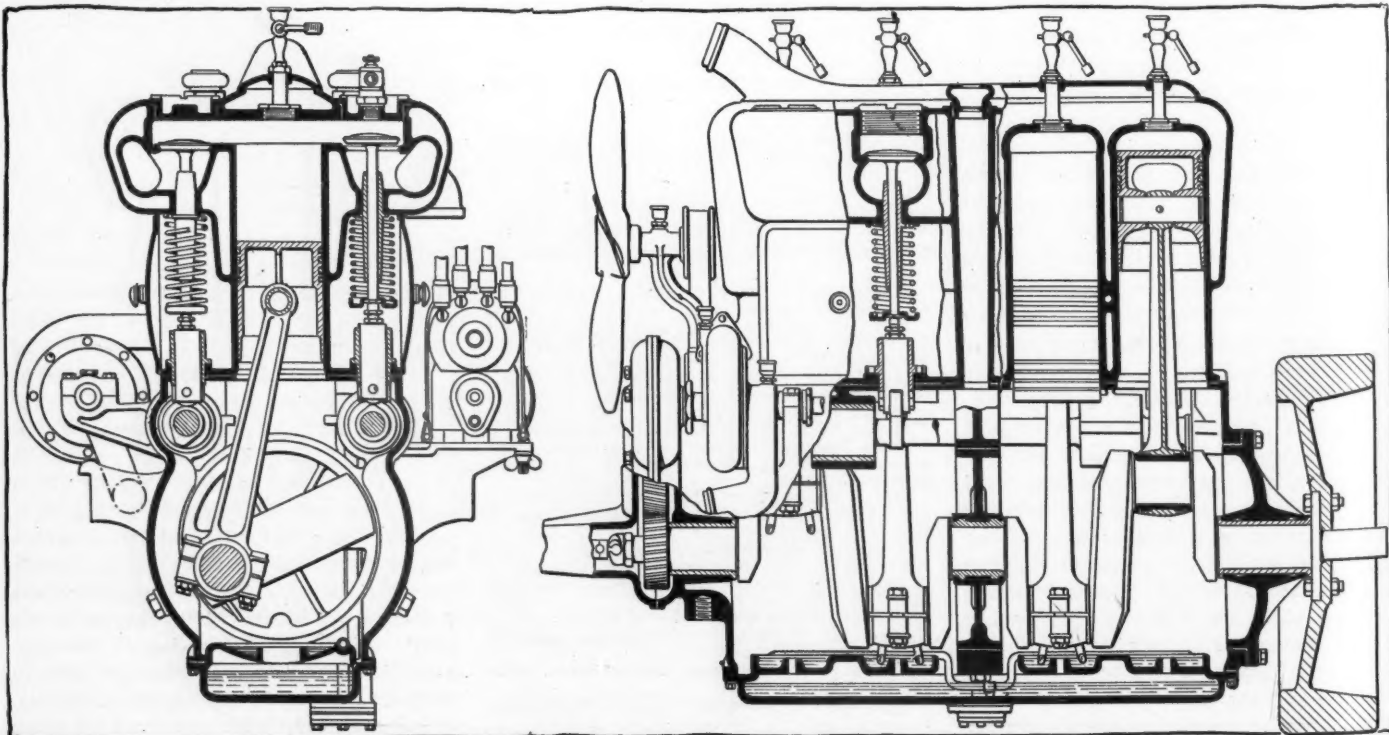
END AND SIDE SECTIONS OF FALLS T-HEAD BLOCK MOTOR, MODEL D
